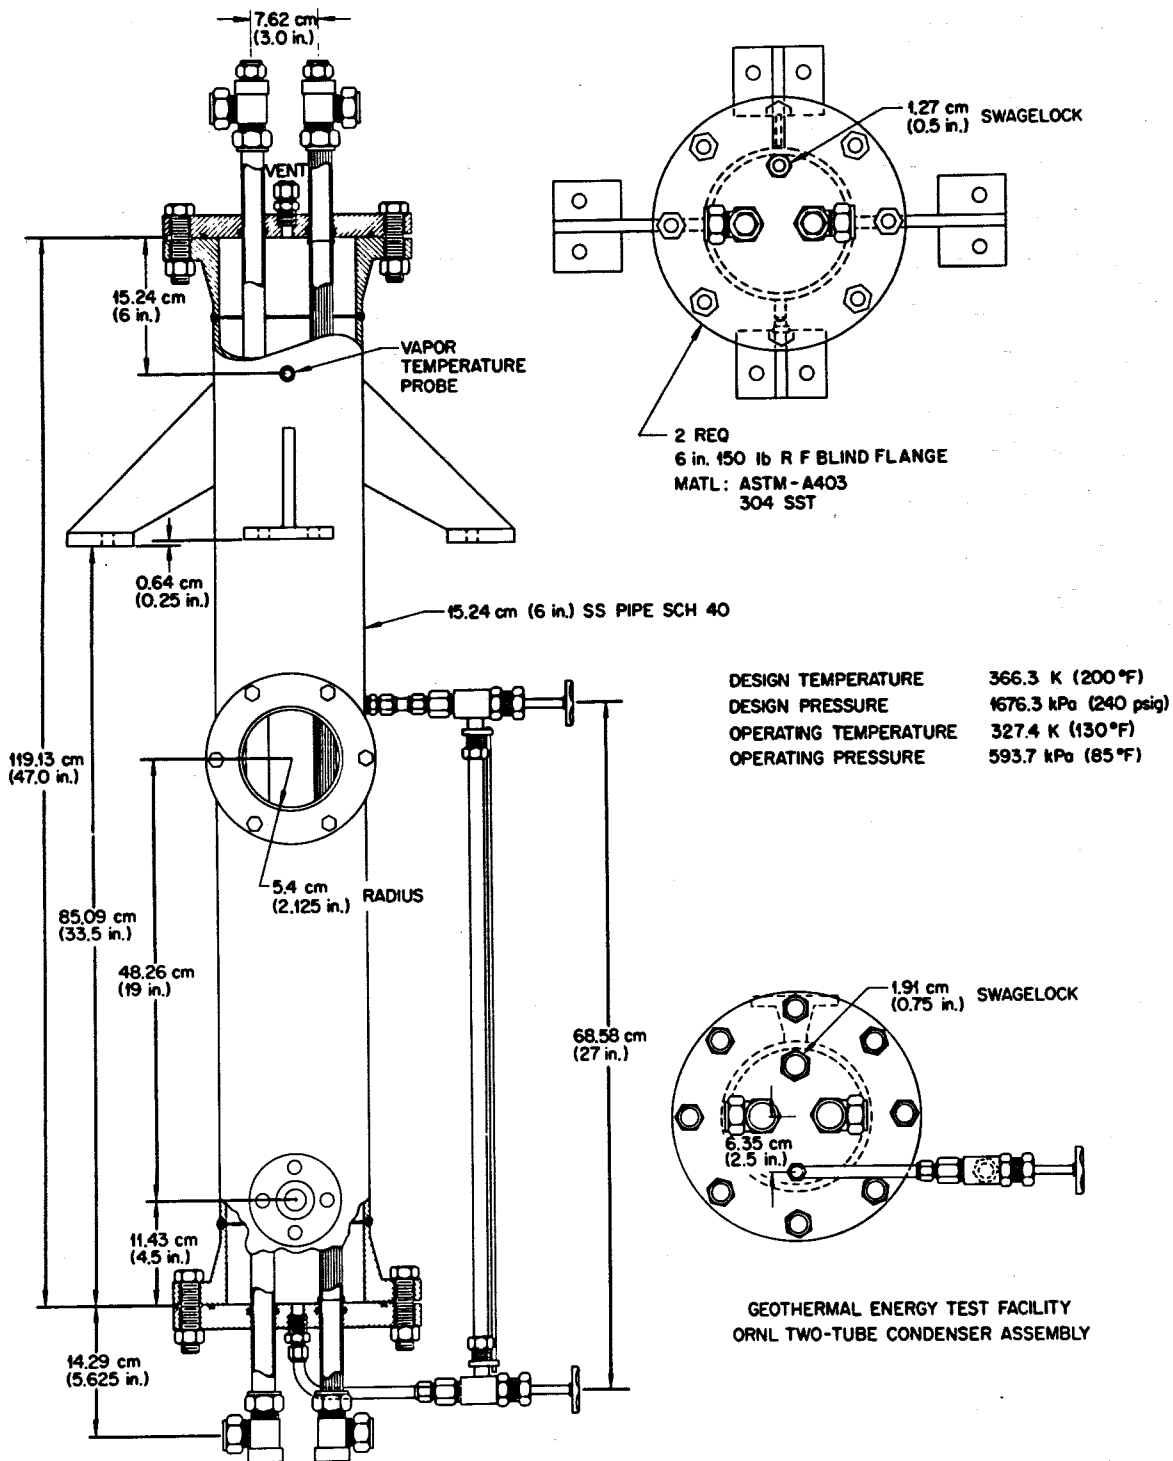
The ORNL two-tube condenser - assembly drawing.
